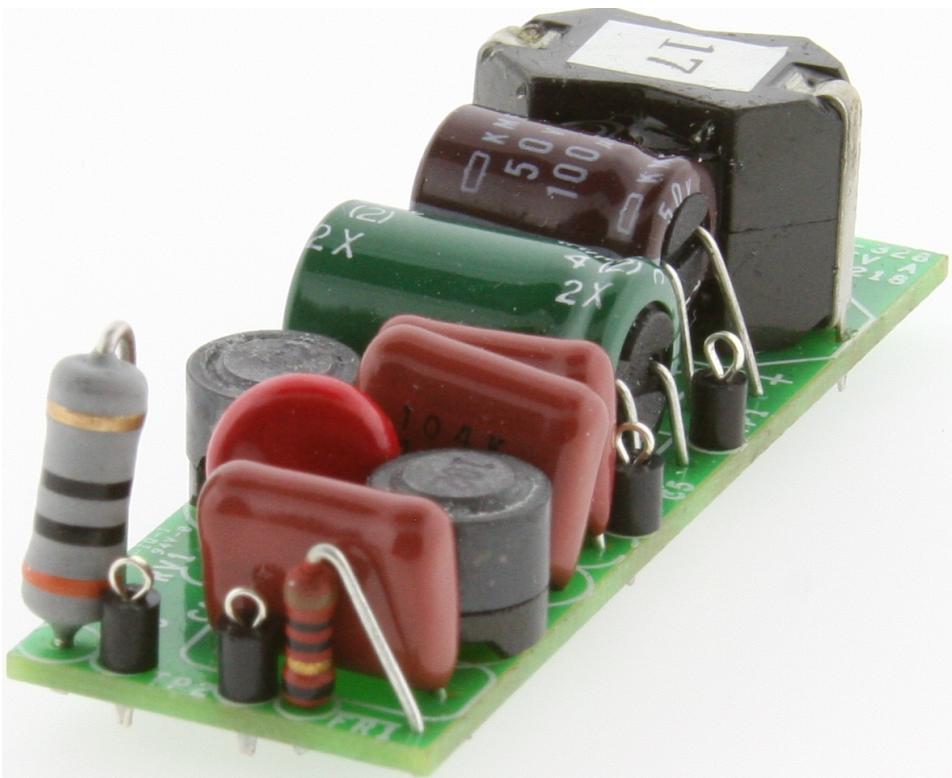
PCB Assembly (54.5 mm x 16 mm).
